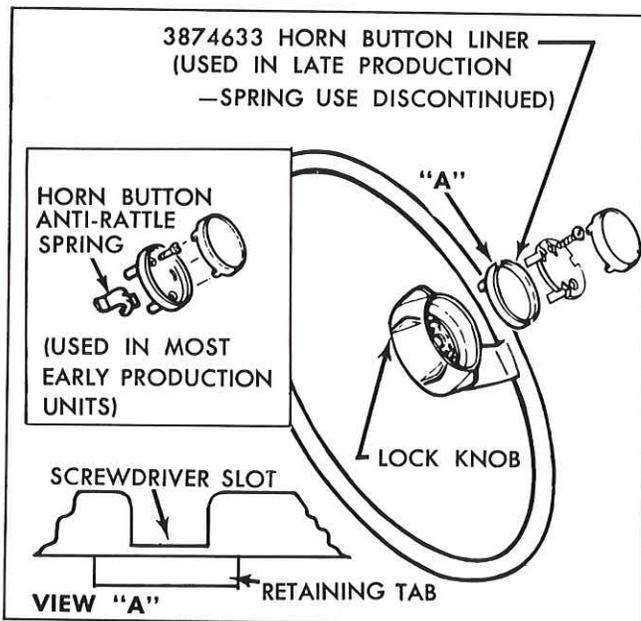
Telescoping Steering Wheel Horn Button Liner
